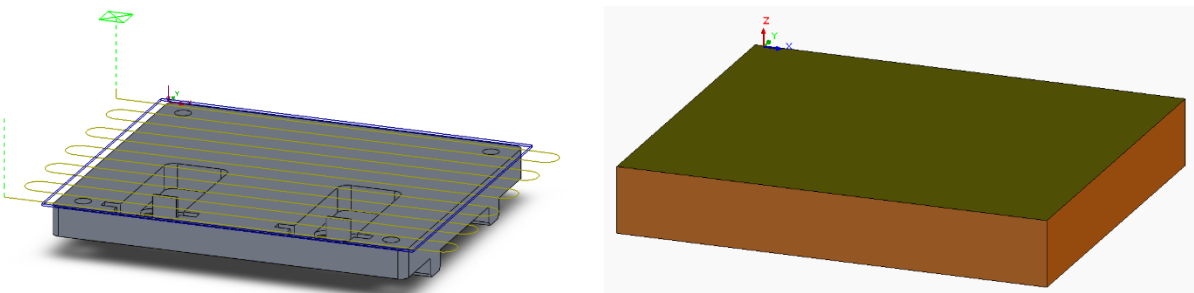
Quick mount facing top surface (a) Tool path (b) Machined result
